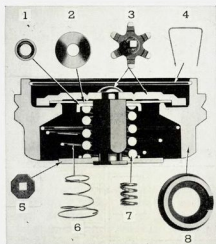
Compression Valve 1 $\frac{3}{8}$ Inch Delco Rear Shock Absorber
